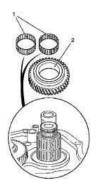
Installing the gear 5second transfer to the main shaft: 1 - Pinion 2 - needle bearings Install pinion 5-th transmission to the main shaft (Fig. 3.72). Cover 2 needle bearing transmission oil. Install 2 needle bearings on the main shaft.
